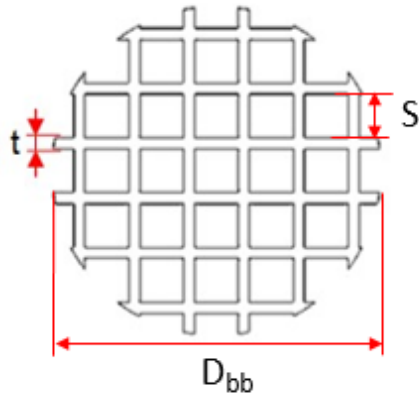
Bubble Breaker cross section showing various geometric parameters; bubble breaker thickness (t), diameter (D_{bb}) and pore size (S).
